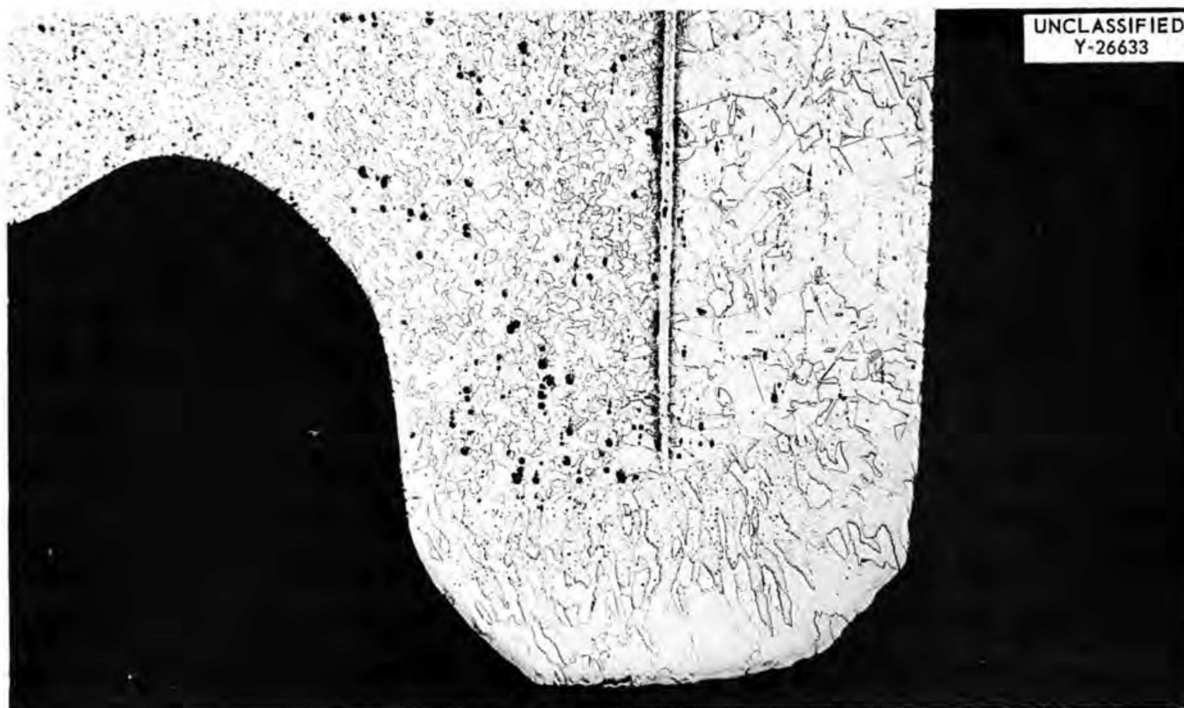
Weld Side of Tube Sheet Showing Complete Flow to the Root of the Weld. Etchant: glyceria regia. 20X.
